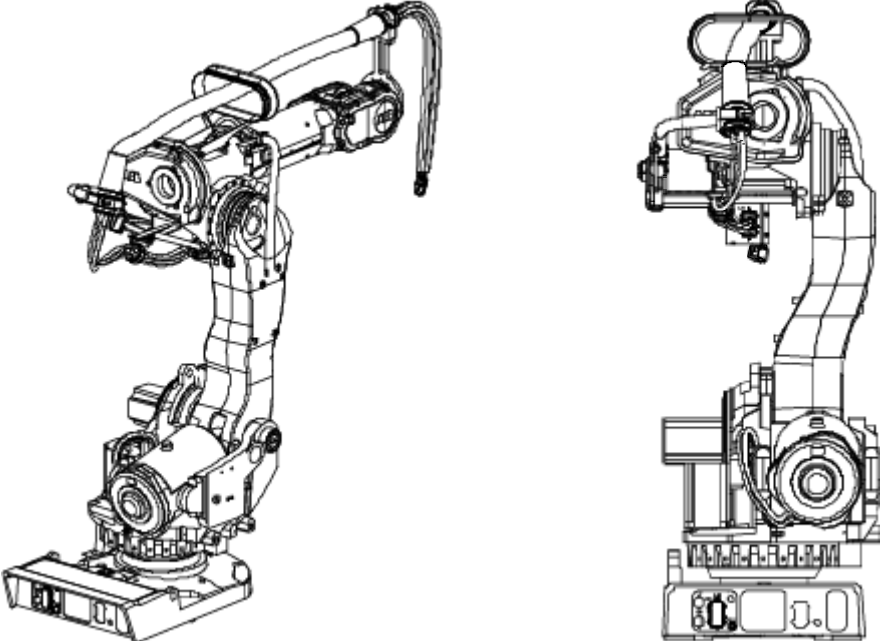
"Silver line" DressPack Lower arm left side view Material handling.
